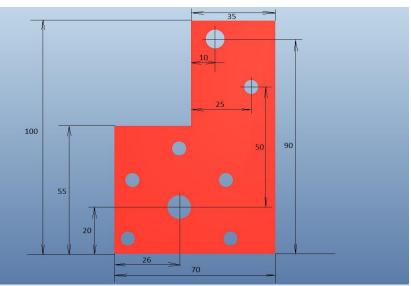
Vehicle version 1 combined wheel and lifter support for the front (motorized) end. Unmeasured hole is the standard fixing size for this design 6mm.
